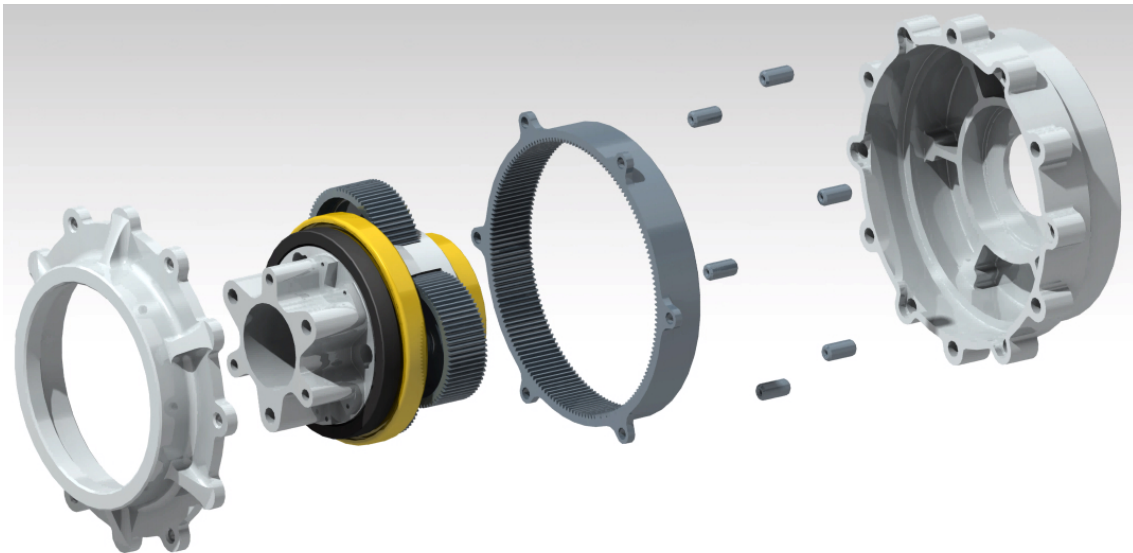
Exploded view of the housing and the ring gear, with the rotating assembly in between
